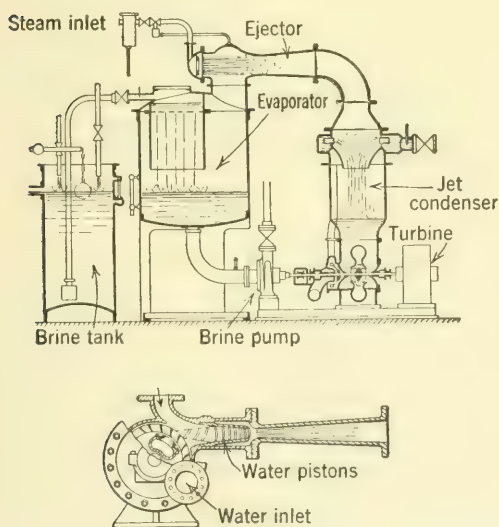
The Westinghouse-Leblanc Refrigerating Machine.
